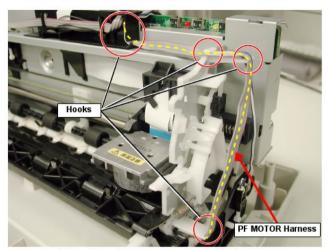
4 hooks Securing the PF MOTOR Harness
